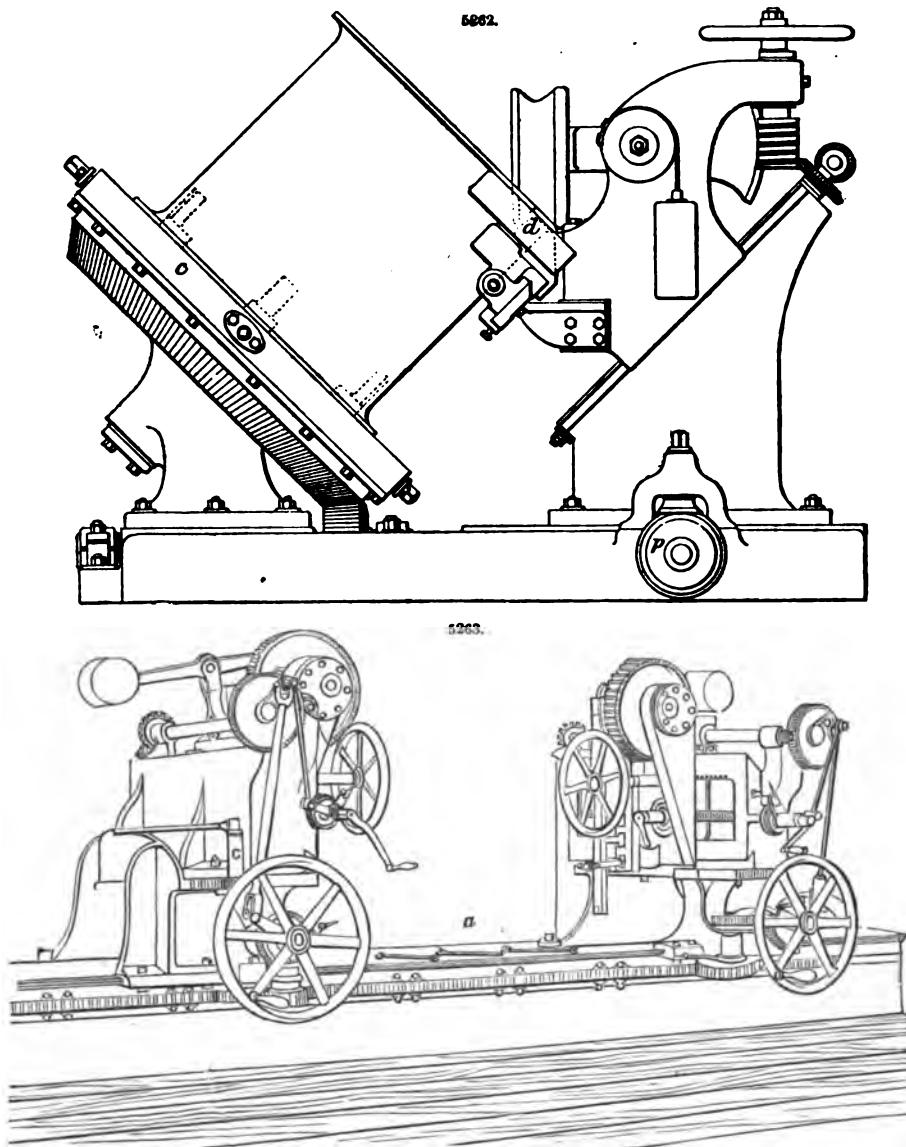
to 5271 are views of a set of machine tools made by Wm. B. Bement and Son, of Philadelphia, for railway purposes. The construction of Bement's machines is well worth careful attention, and we regret that, owing to circumstances, our illustrations do not sufficiently indicate the ingenious mechanism and extended applications of these important tools.
